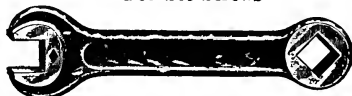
D FOR HEXAGON HEAD CAP SCREWS
